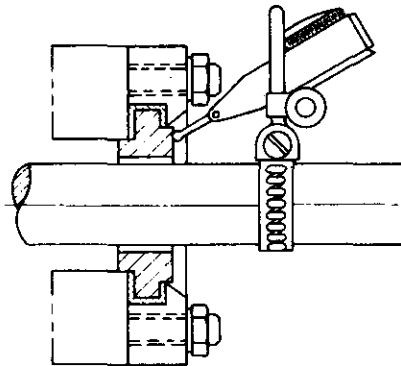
Dial Indicator Mounted On The Shaft Makes Alignment Of The Stationary Seal Seat To 0.001 Inch TIR Easy
